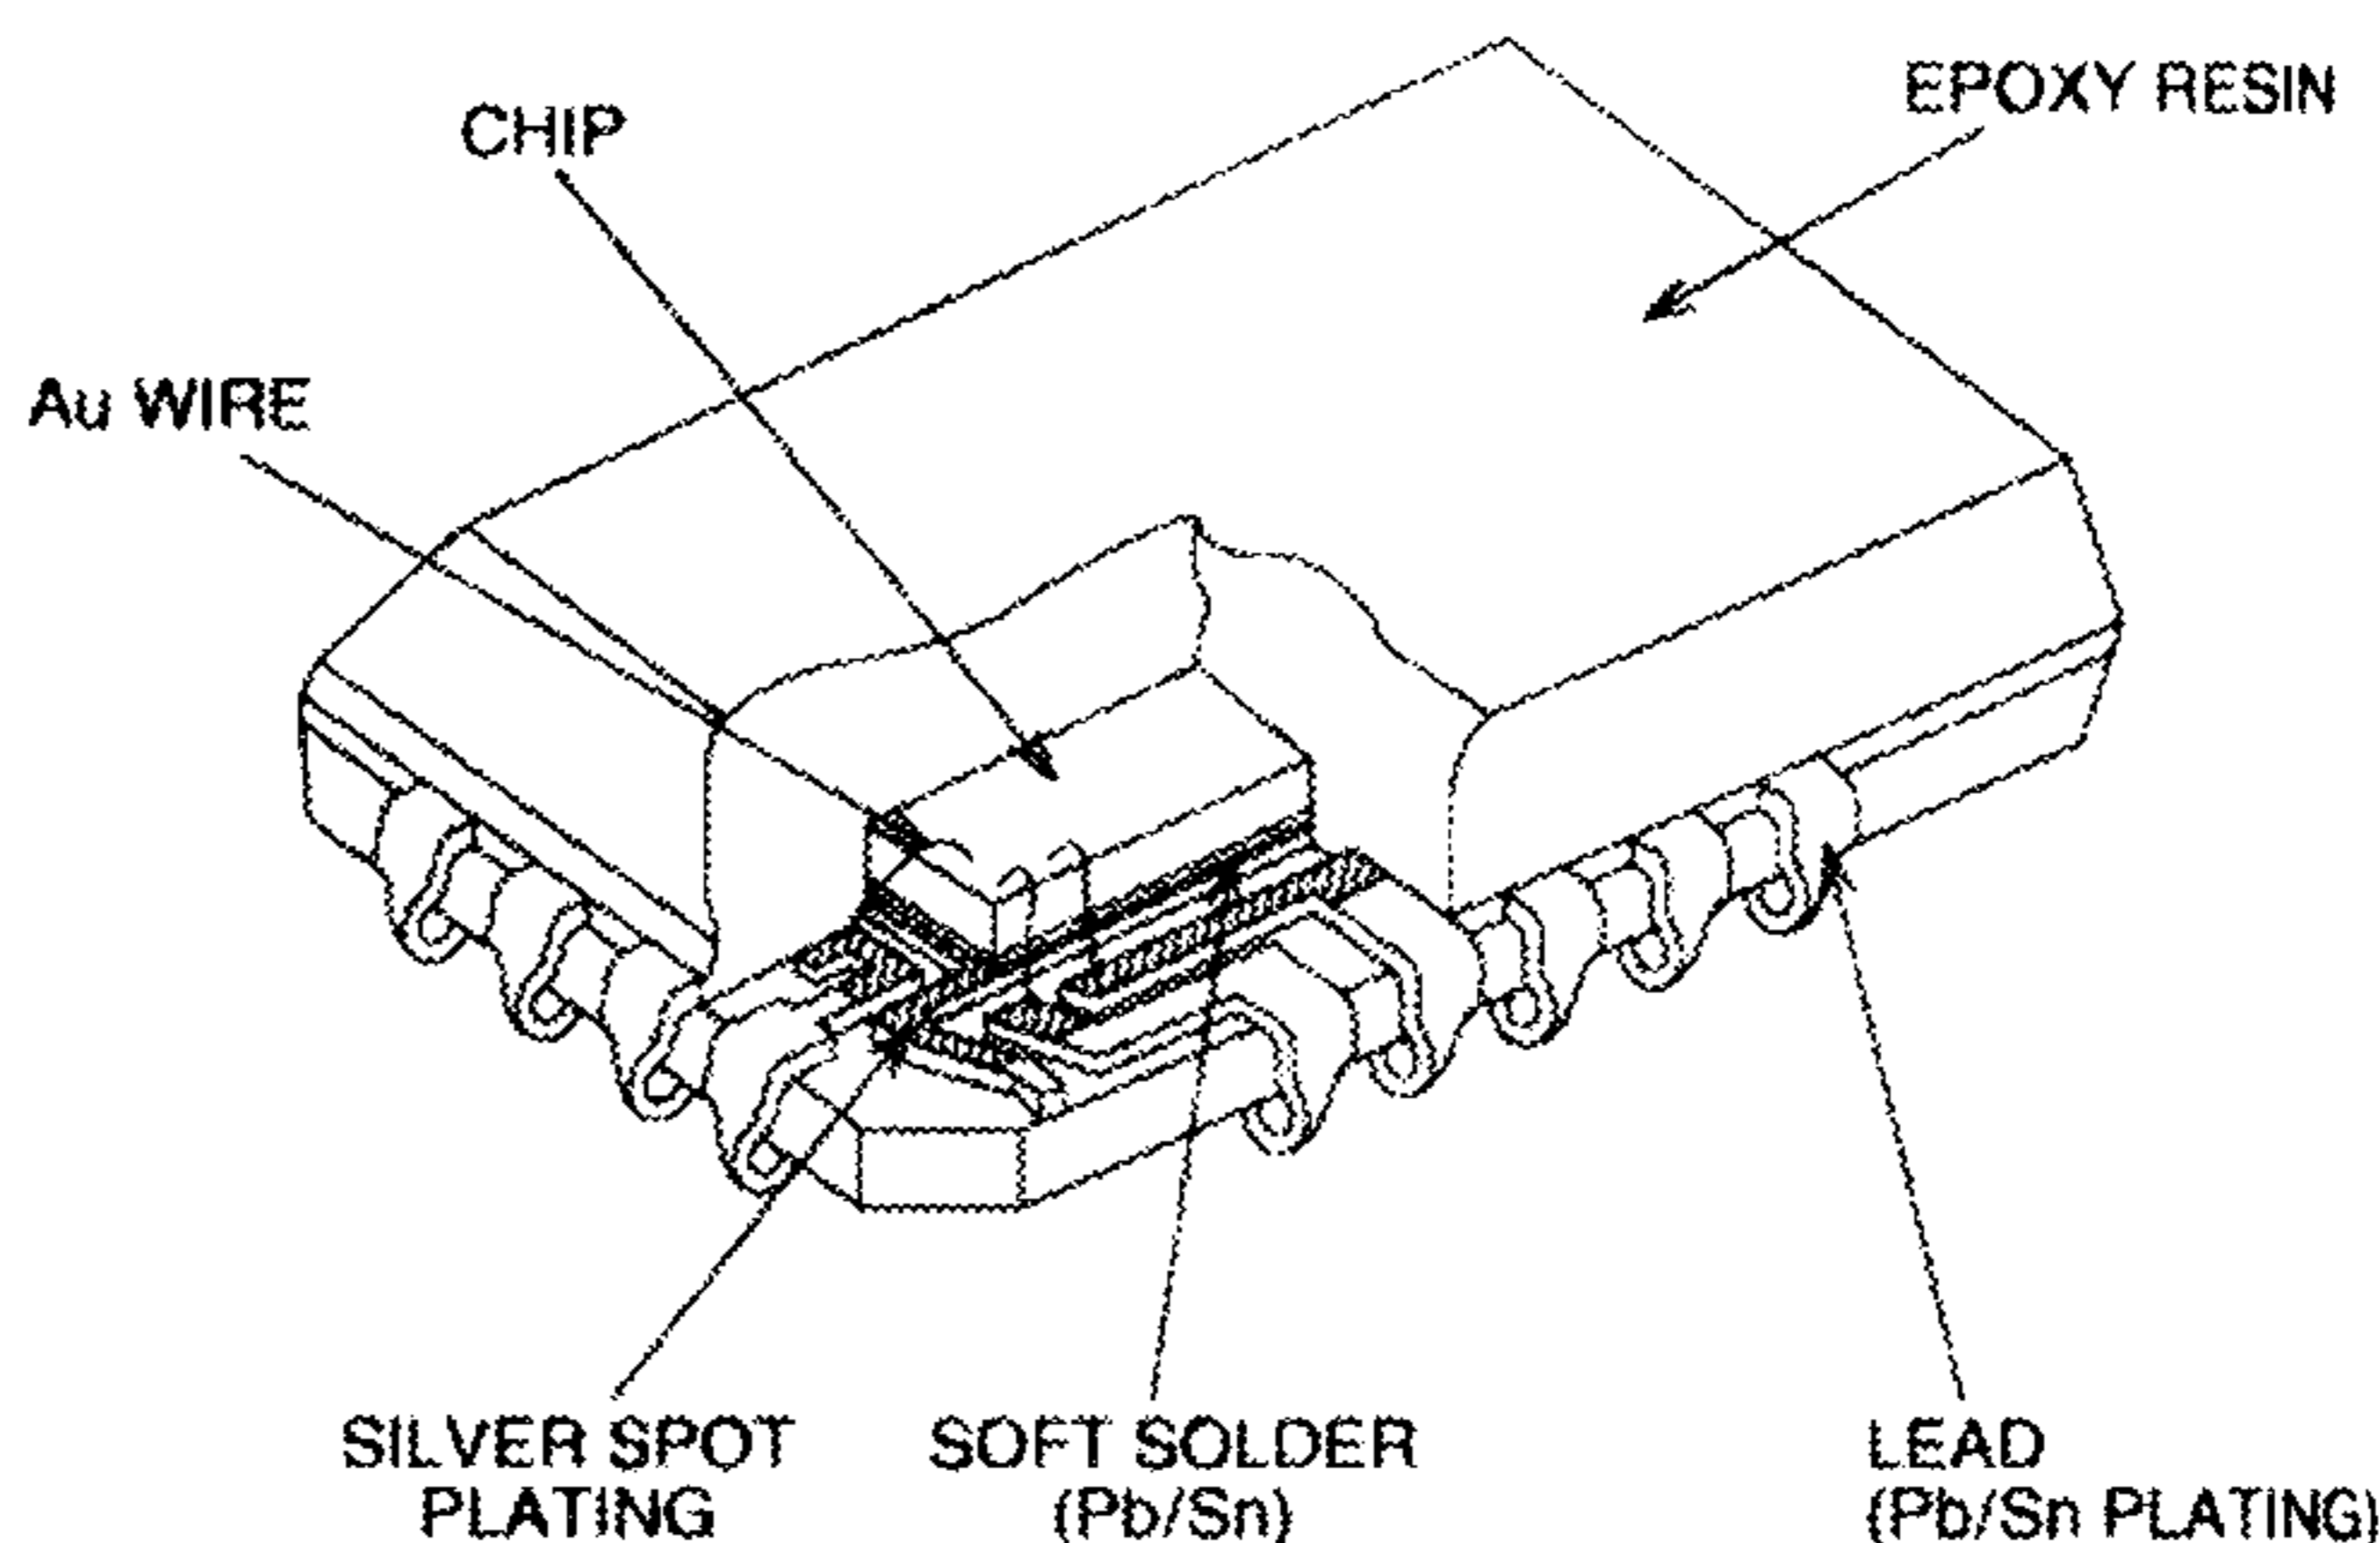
Drawing showing fabrication details of a quad flat J chip carrier.
